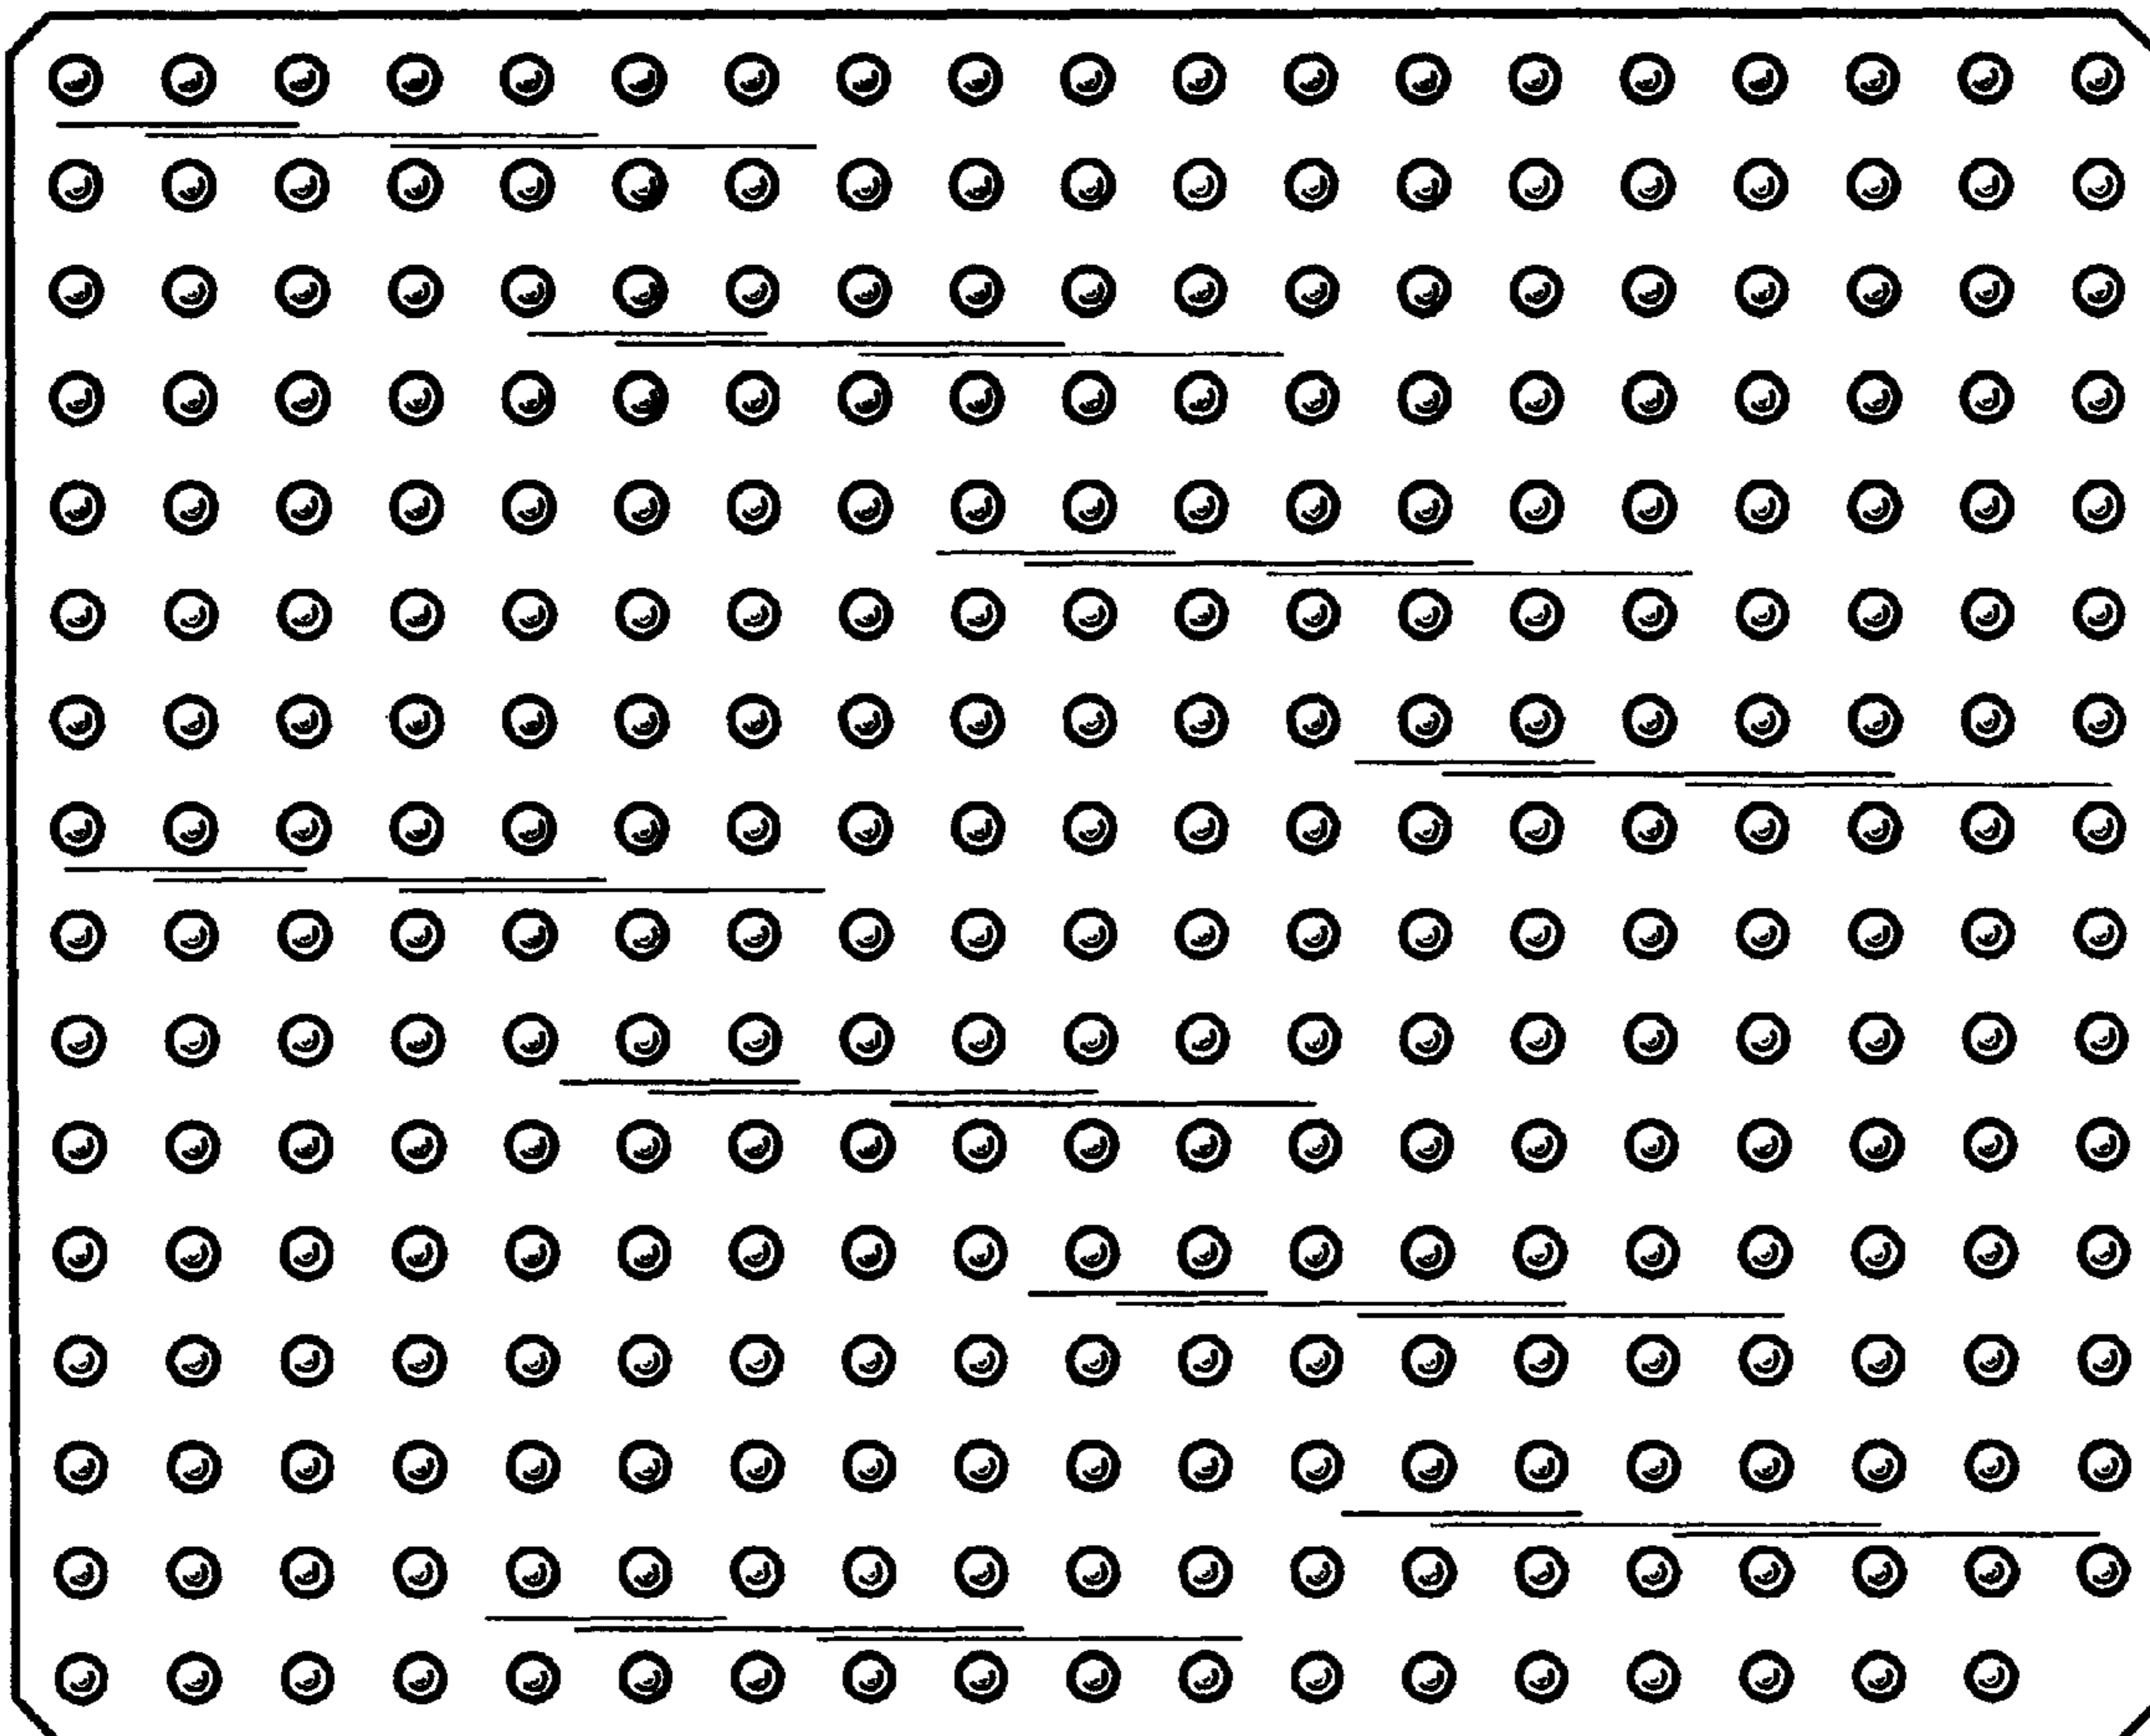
is a bottom, plan view of a solder ball interposer according to the present design.
